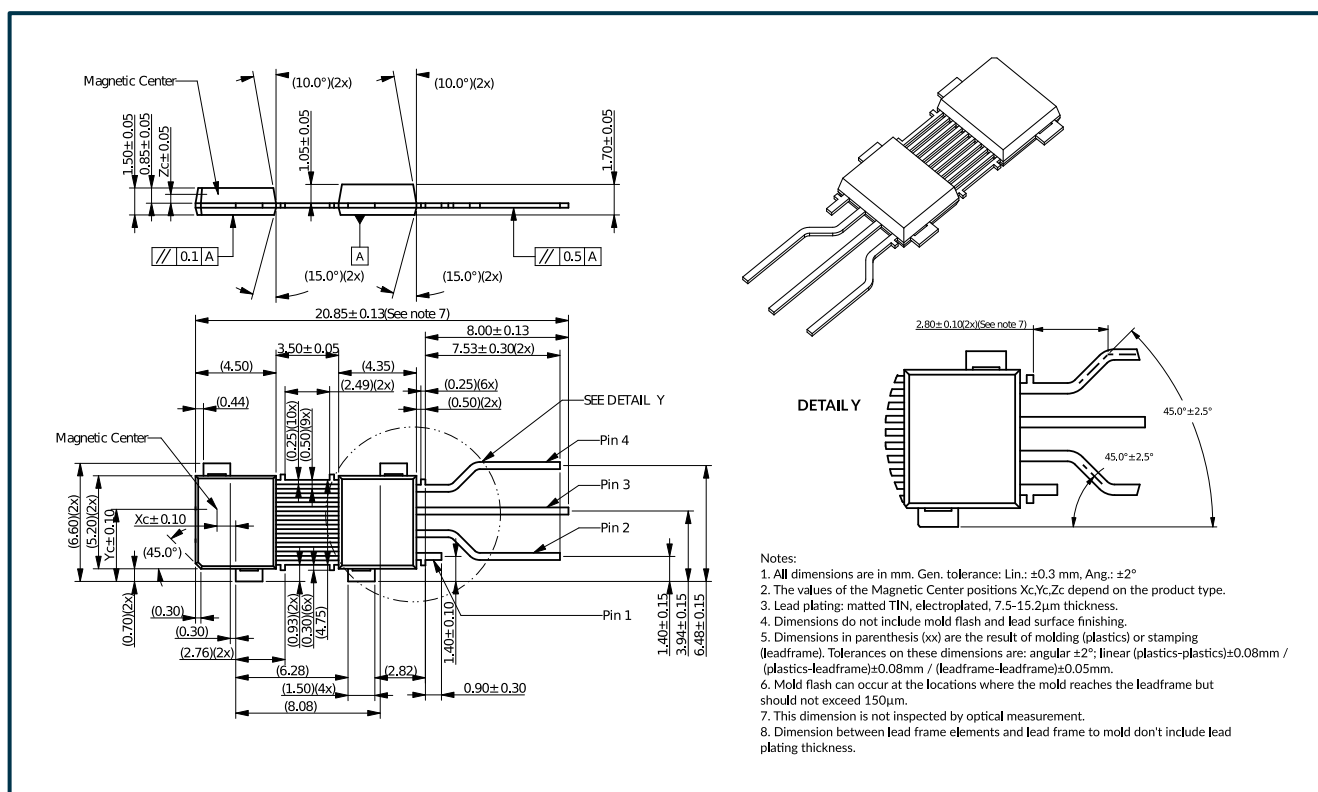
DMP-4 STD1 2.54 Package Outline Drawing
